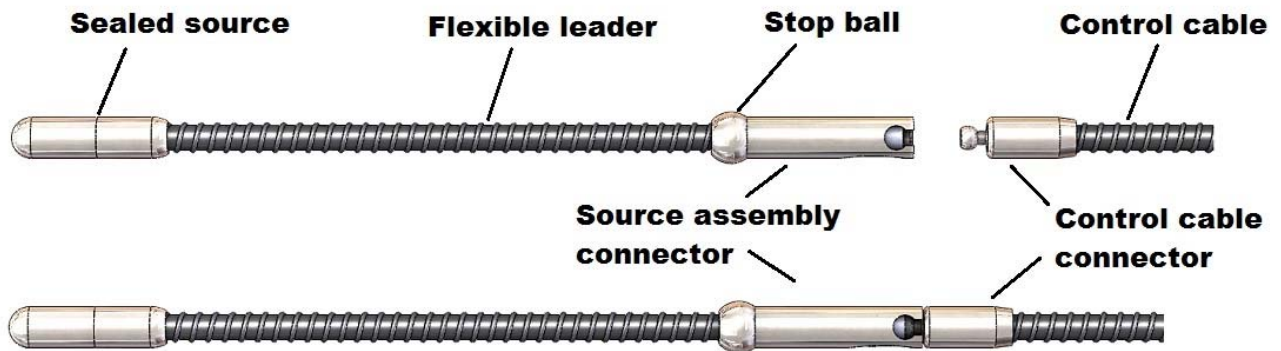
Source Assembly (Shields not shown) & Remote Control Cable Connectors.
